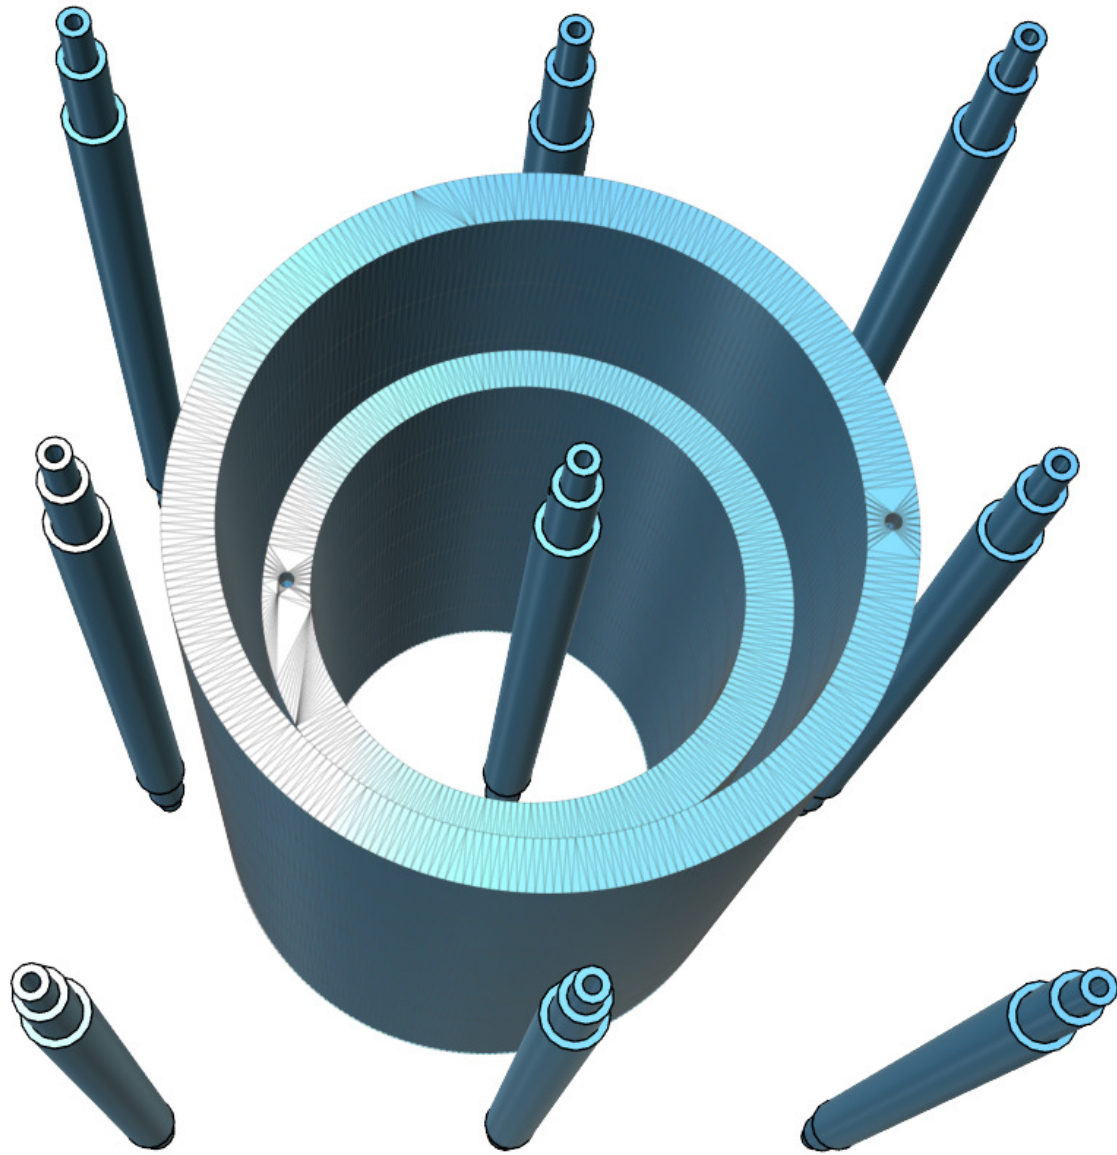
CAD Model of 3D Printed Antenna - Solid View
